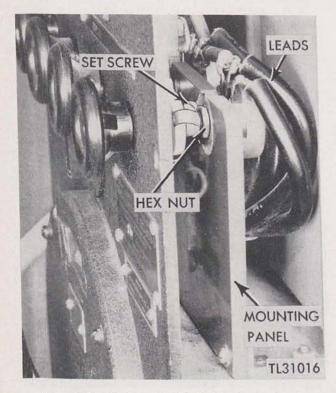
Oscilloscope BC-403-E, showing location of Potentiometers 50, 51, and 52 (1-2).
